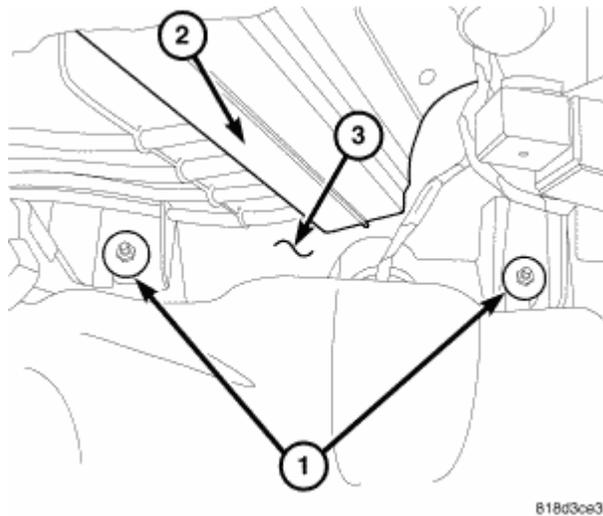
Suction Line Assembly, Nuts, A/C Expansion Valve, Heater Hoses & Dash Panel
